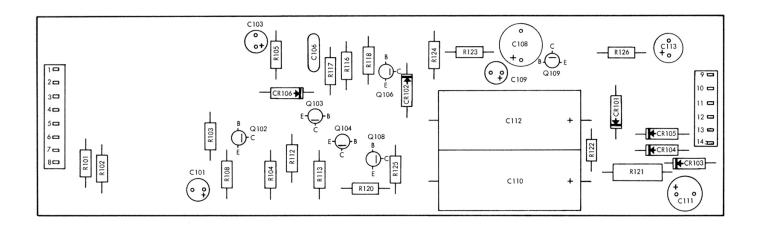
Electronic Part Locations (2D669-1), Mixer Amplifier PCB Assembly
